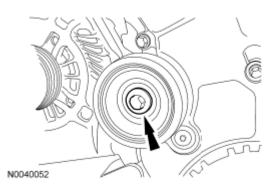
Locating Coolant Pump Pulley Bolts Courtesy of FORD MOTOR CO.
